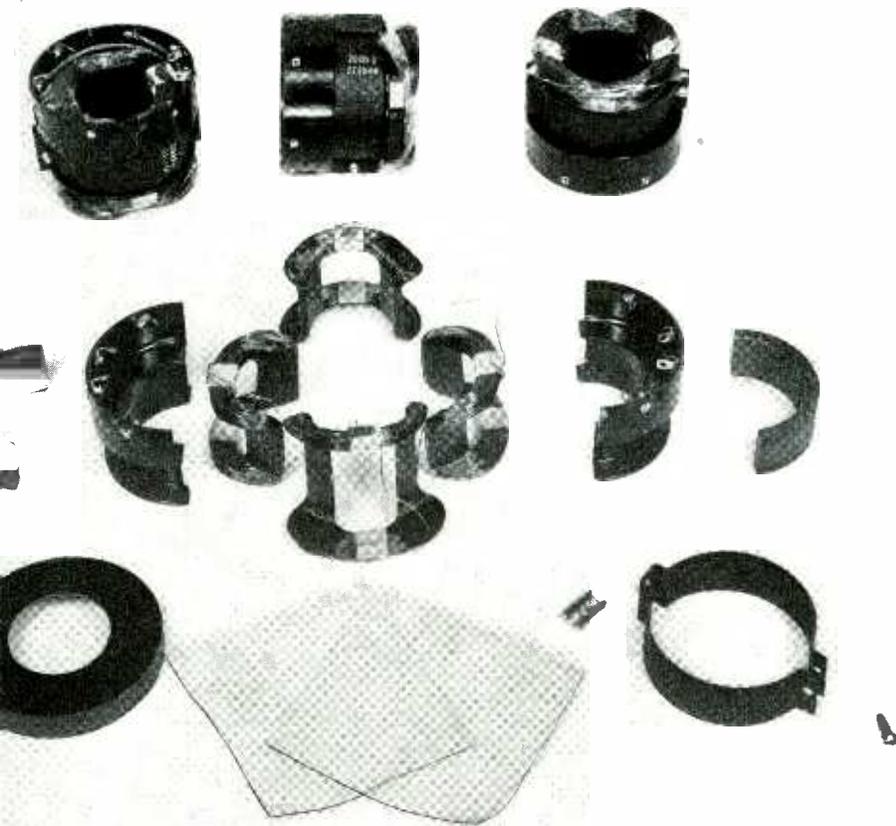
Photograph showing the assembled and disassembled views of the type 206D1 yoke
